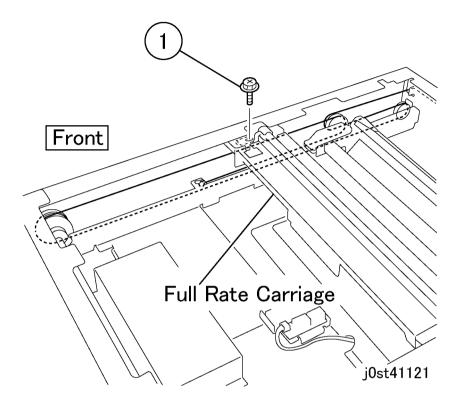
Installing the Carriage Cable at the front (j0st41121)
